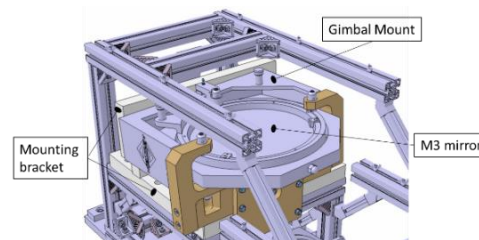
View of the additional support arm within the WAV-M3 sub-assembly.
